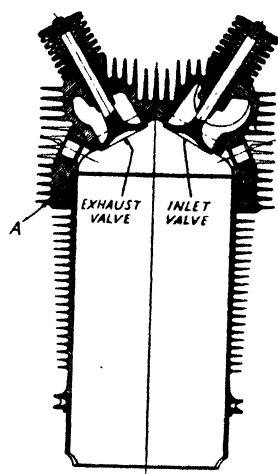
Air-cooled cylinder with an open-ended steel barrel screwed into an aluminium alloy head.
